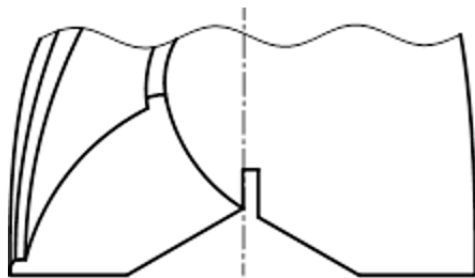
Twist drill without a transverse edge, with a reverse angle at the tip and outer edges at an angle of 180°.
